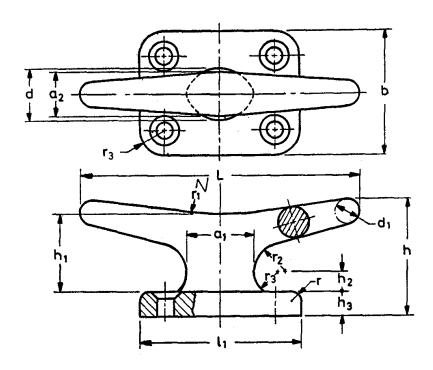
Double Horn Cleats with Oval Base —Bolted or Riveted Type
